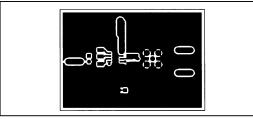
MAX840 EV Kit PC Board Layout—Component Side (not shown to scale)
